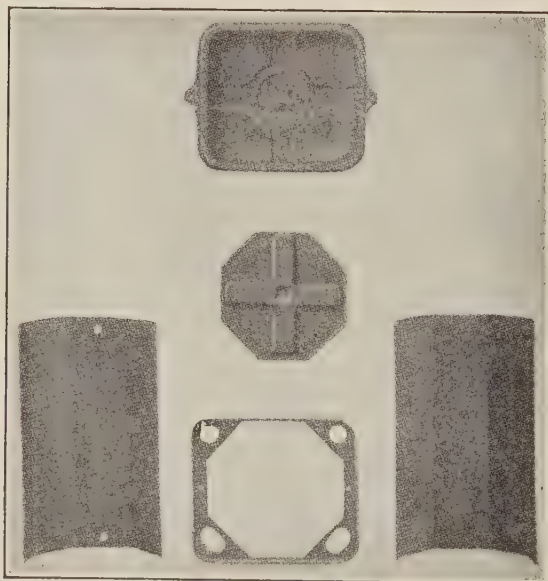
A.—Sheet metal parts of a transformer case prior to welding.
